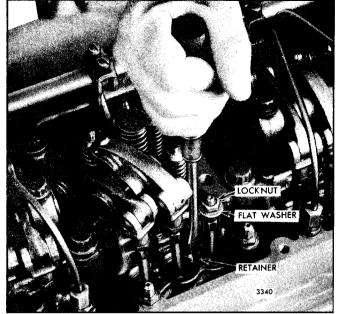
Removing Push Rod from Upper Side of Cylinder Head using Tool J 3092-01
